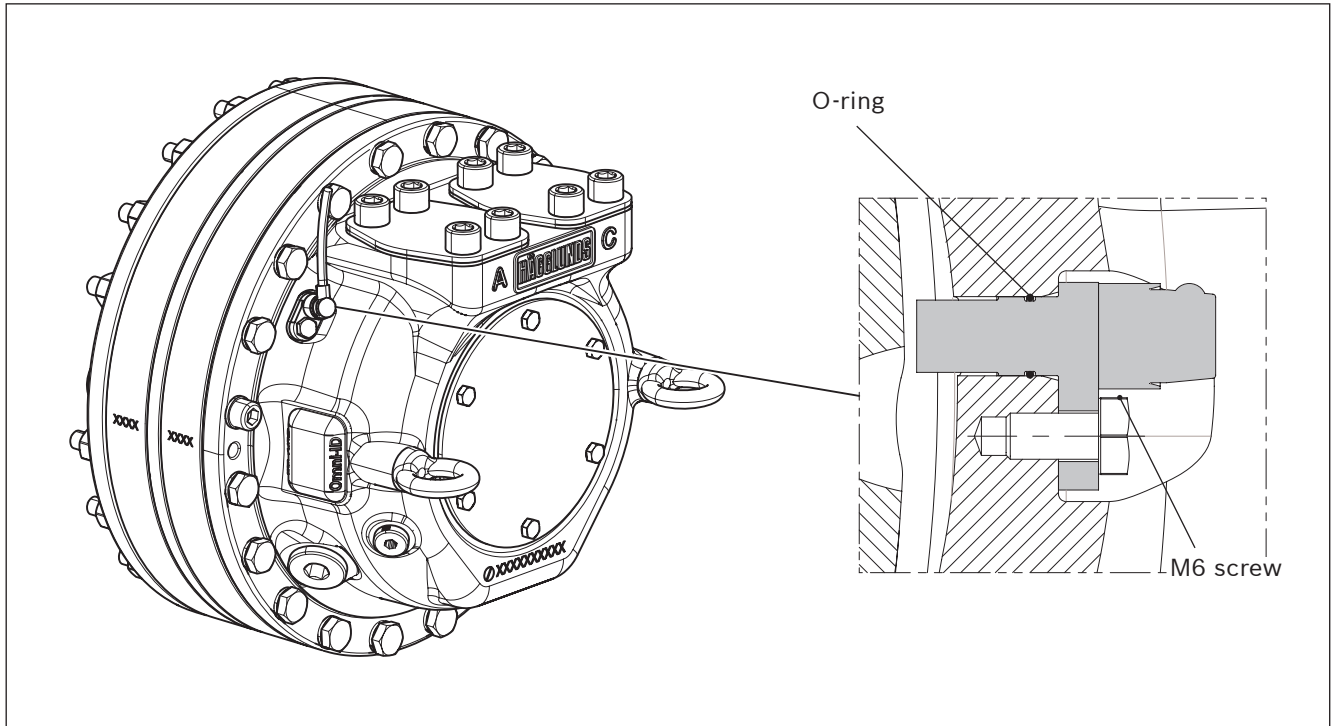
Speed sensor DSA series 2 mounted at Atom motor
